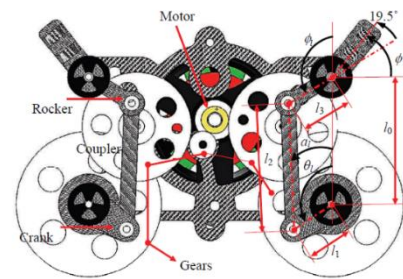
Four-bar linkage and crank rocker mechanism
